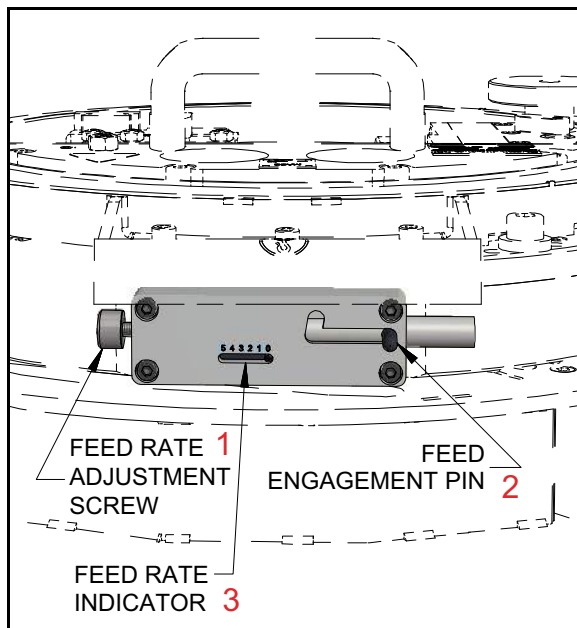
FEED ENGAGEMENT AND FEED RATE ADJUSTMENT CONTROLS (FF1200 SHOWN)
